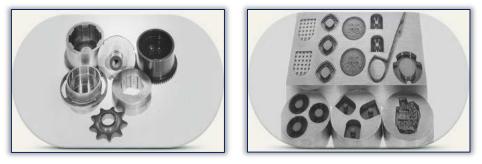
Examples of machined parts with ECM made from alloy steels and construction steels [9]
